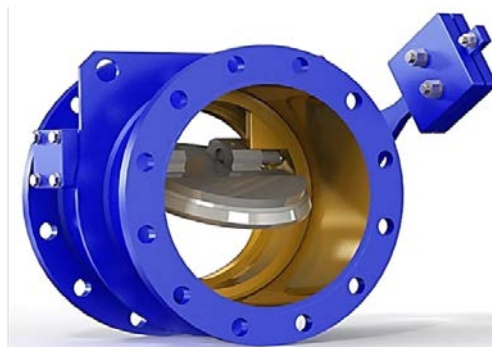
3D assembly model of the swing check valve with lever and weight – regulation (throttling)
